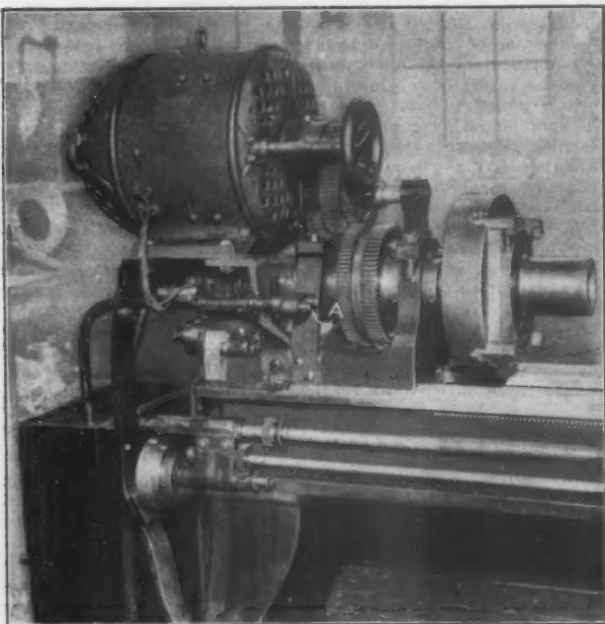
An 18-in. Lathe Changed from Belt to Motor Drive by the Application of a  $3\frac{1}{2}$ -Hp. Motor Built by the Reliance Electric & Engineering Company, Cleveland, Ohio.
